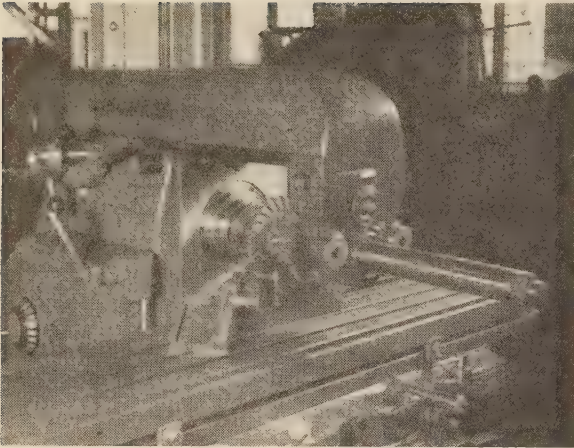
SETUP USED IN DOWN MILLING A CAST-IRON PART ON MACHINE EQUIPPED WITH BACKLASH ELIMINATOR
